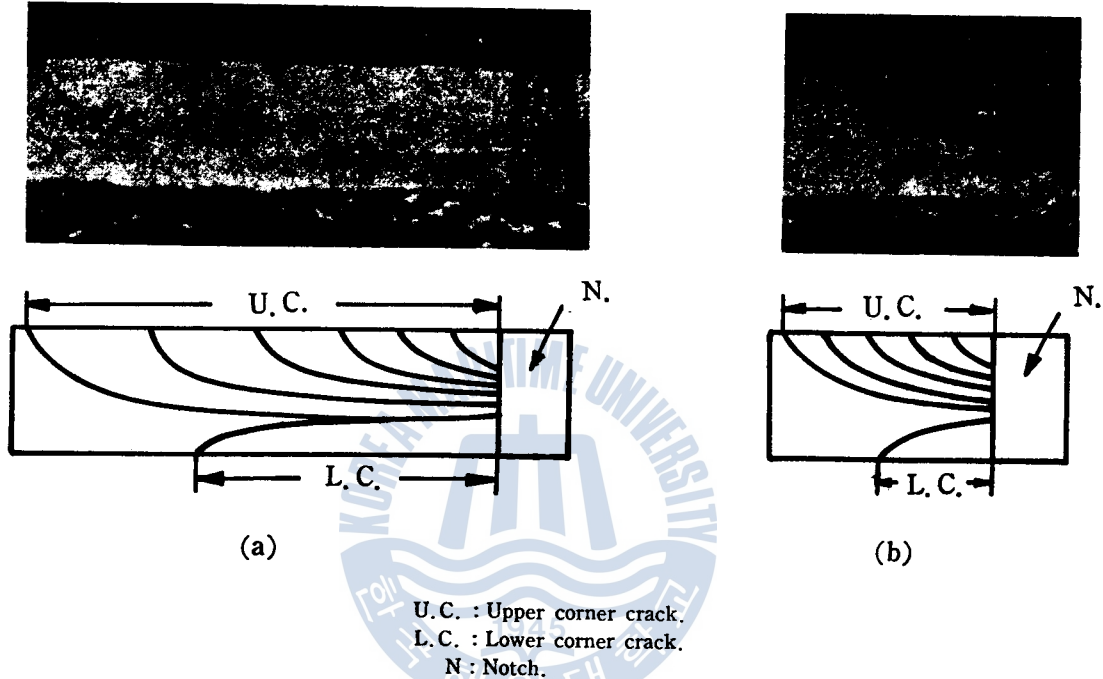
Macrographs of fracture surfaces and beach marks.
